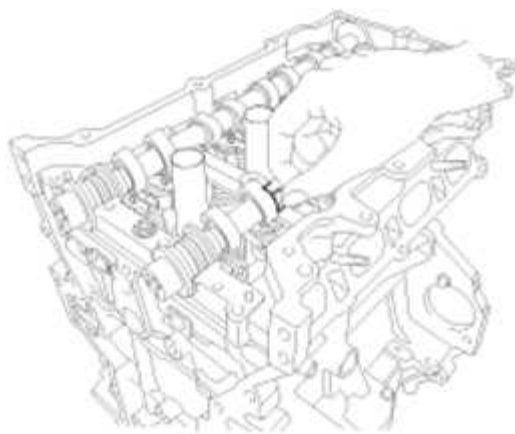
Inspecting Camshaft Journal Clearance
